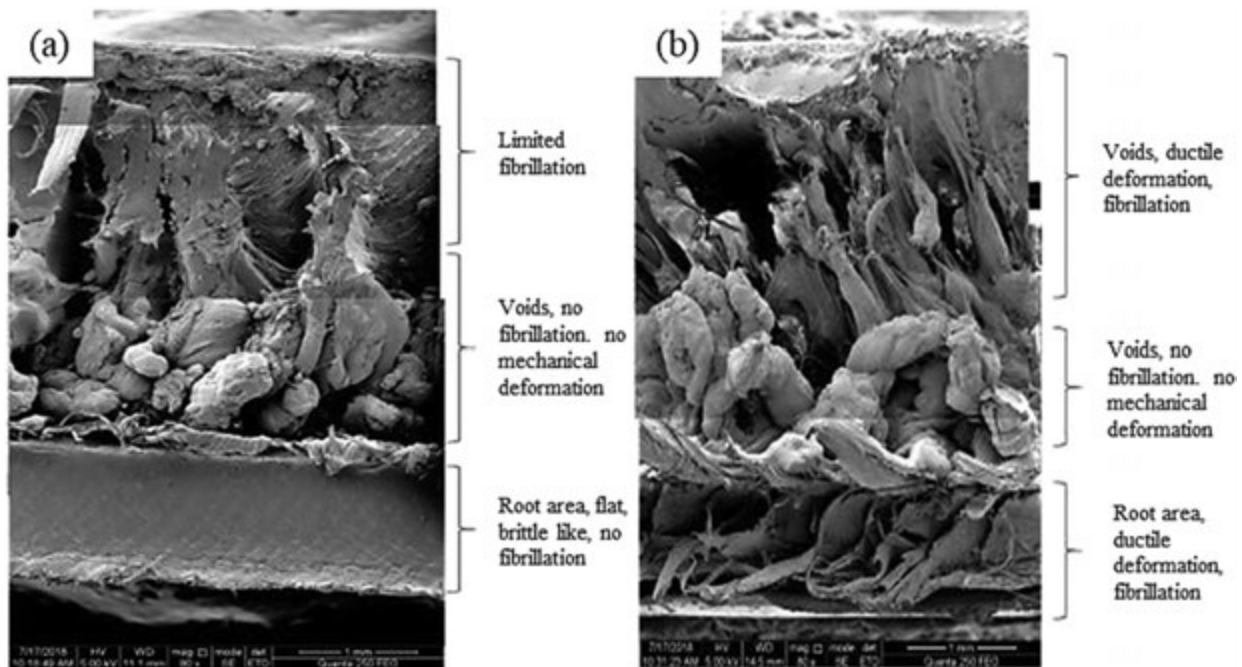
(a) Macrostructure morphology of tensile fracture surface of sample 1 welded at 800 rpm, 20 mm/min (b) microstructure morphology of tensile fracture surface of sample 2 welded at 1000 rpm, 40 mm/min. Reproduced from Sheikh-Ahmad, J.Y., *et al.*, 2019. Friction stir welding of high density polyethylene – Carbon black composite. *Journal of Materials Processing Technology* 264 (4), 402–413.
